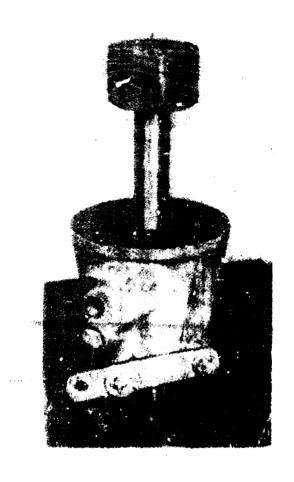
Pressing the front axle output shaft bearings from their carrier
